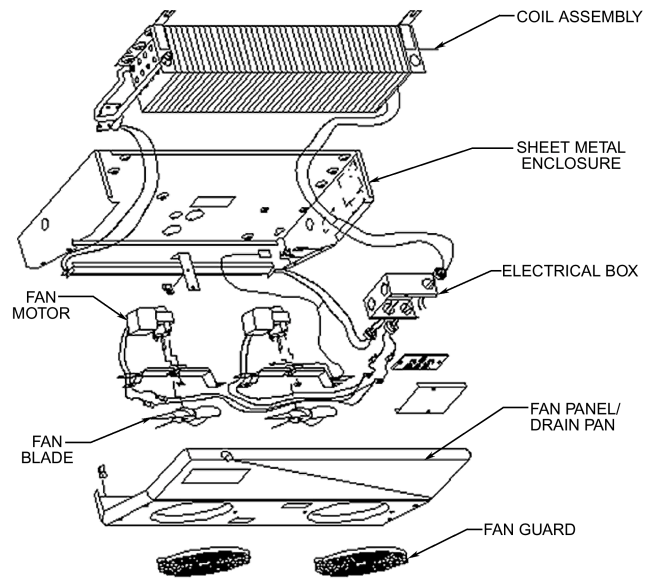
Sloped-Front Unit Cooler for Reach-In Cabinets
